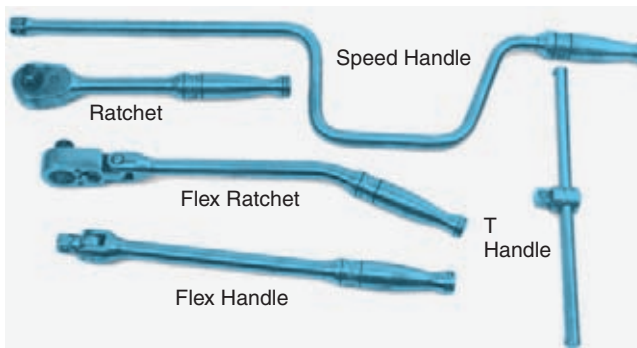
Typical drive handles for sockets. (Courtesy of James Halderman)
